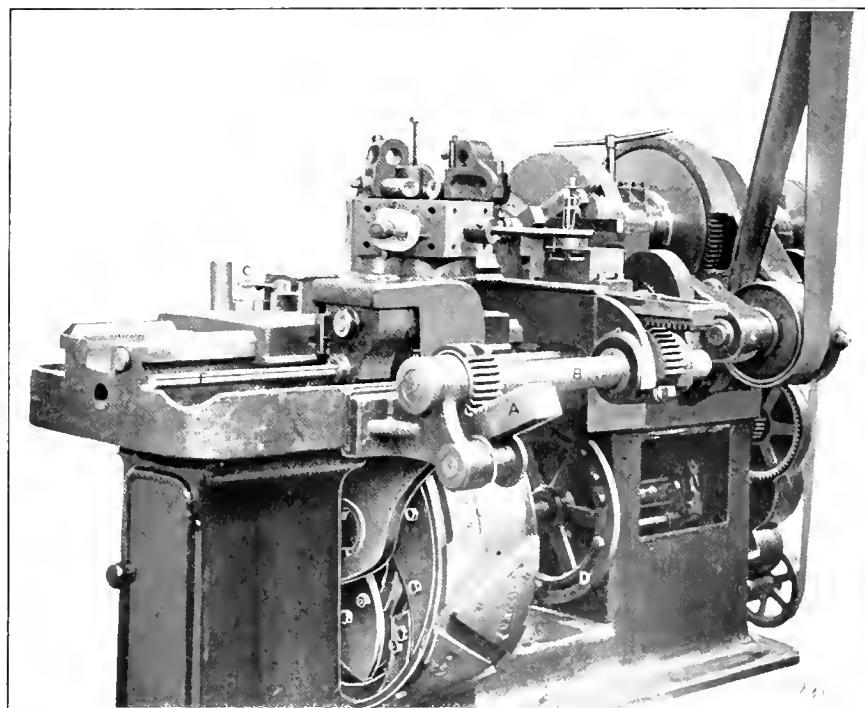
Rear View of Machine set up for Work as in Fig. 2; shows the Cross-slide Mechanism, Driving Gearing, etc.
